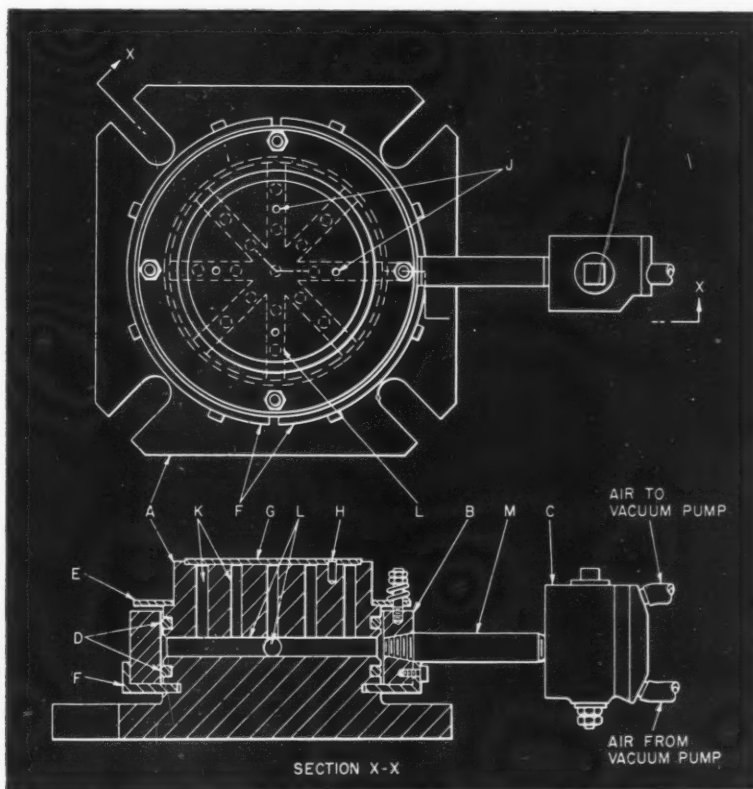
Thin, non-ferrous disc (*G*) is held firmly in place during grinding by creating a vacuum in the chuck. When the setting of valve (*C*) is changed, the work-piece is blown from the chuck
